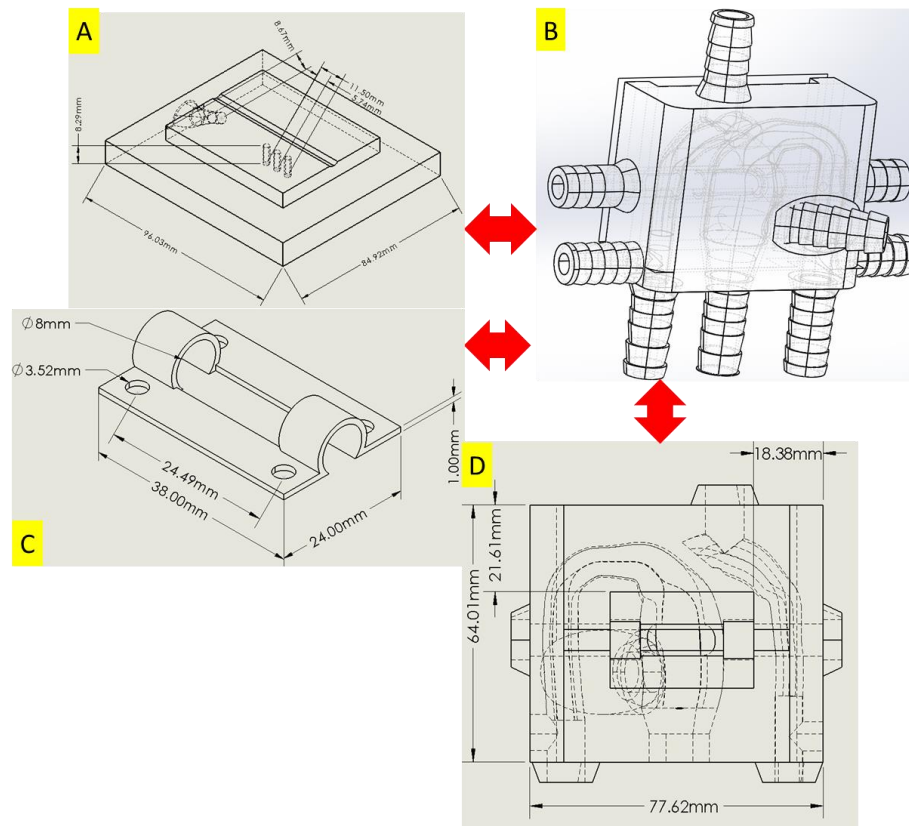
Design iteration 1 for top and bottom half of the centerpiece A. Changes made to the machined part with a slot for otoscope B. View of the centerpiece. C. Clamp designed to hold the baffle D. Interior view of the top half of the centerpiece
